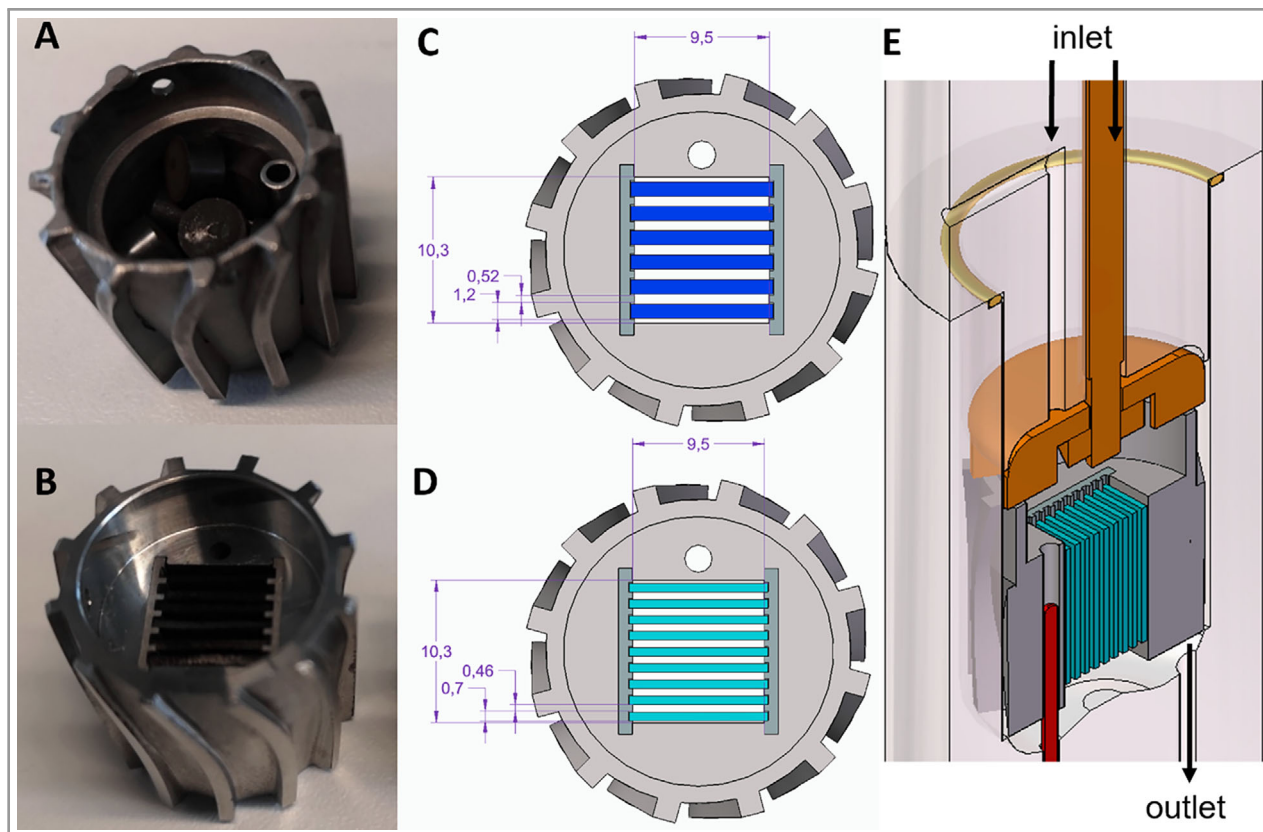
Photographs and schemes of the sample holders: the filled original sample holder (A), the filled adapted sample holder for plates (B) here, both shown without the fixing ring and mesh to secure the catalysts during operation, a scheme for the adapted holder with inserts for sample widths below 1200 μm (C), with inserts for samples widths below 700 μm (D), and the assembled reactor (E).
